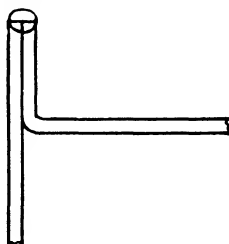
Edge weld flat position. Edges should be fitted up close. The electrode to be held perpendicular and drawn along seam with arc only long enough to obtain a smooth rounded bead.
